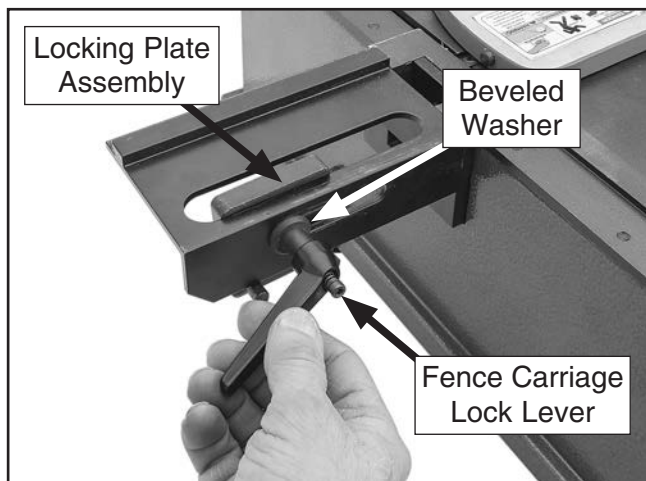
Securing locking plate assembly with fence carriage lock lever and beveled washer.
